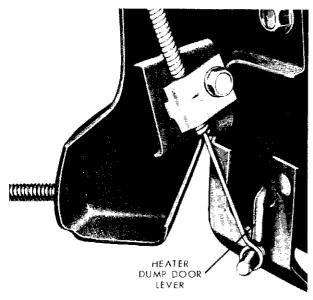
Heater Dump Door Adjustment-1960-(60E-8808)
